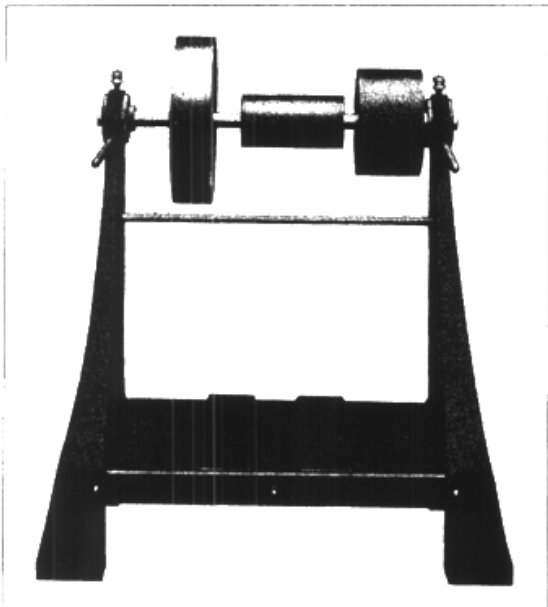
Individual Motor Drive Jackshaft, ball-bearing
